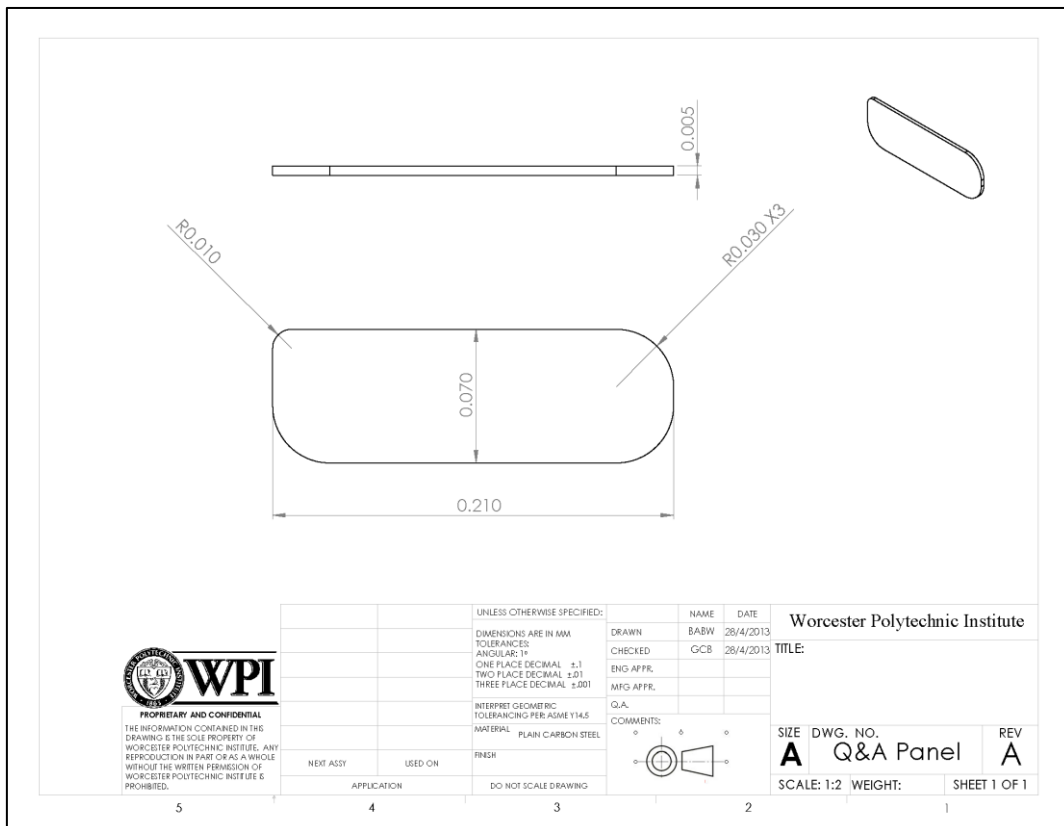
Q&A Panel Engineering Drawing Screenshot
